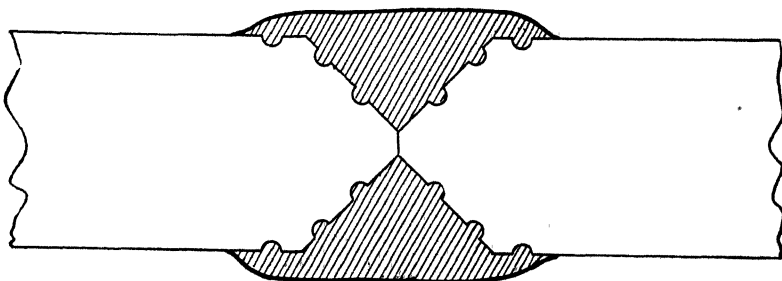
Showing use of grooves instead of studs in welding cast iron.
